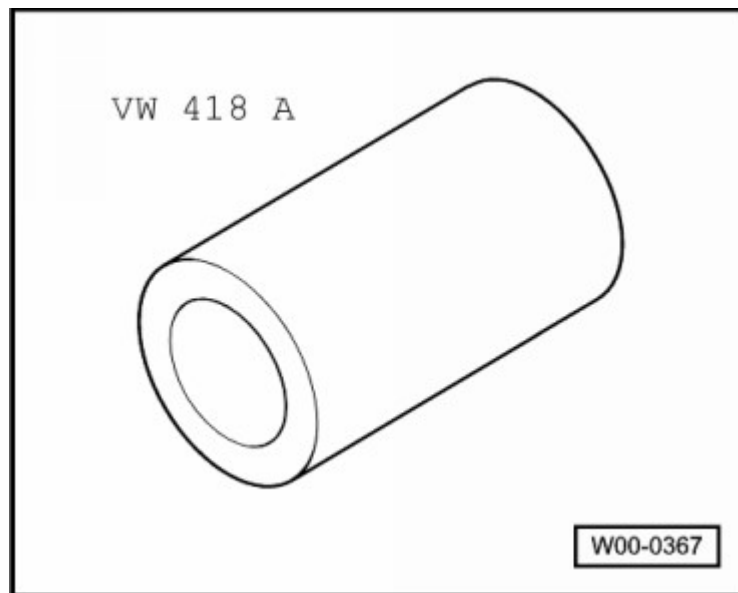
Identifying Tube 31.5 mm Dia.VW 418 A
